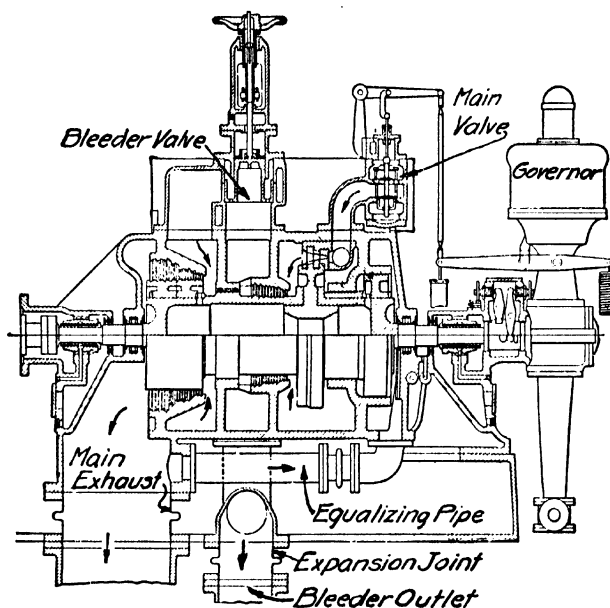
Section through a Westinghouse Bleeder Type Turbine.
